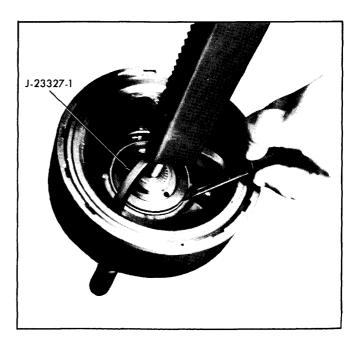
Compressing Forward Clutch Spring Retaining Seat
